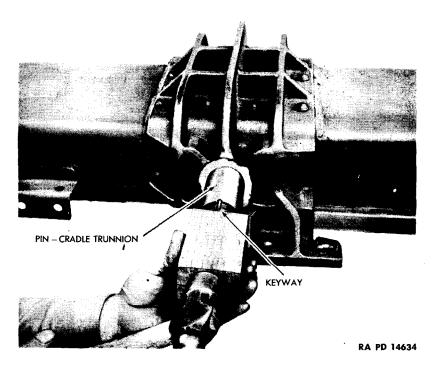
Driving Cradle Trunnion Pin in Cradle
